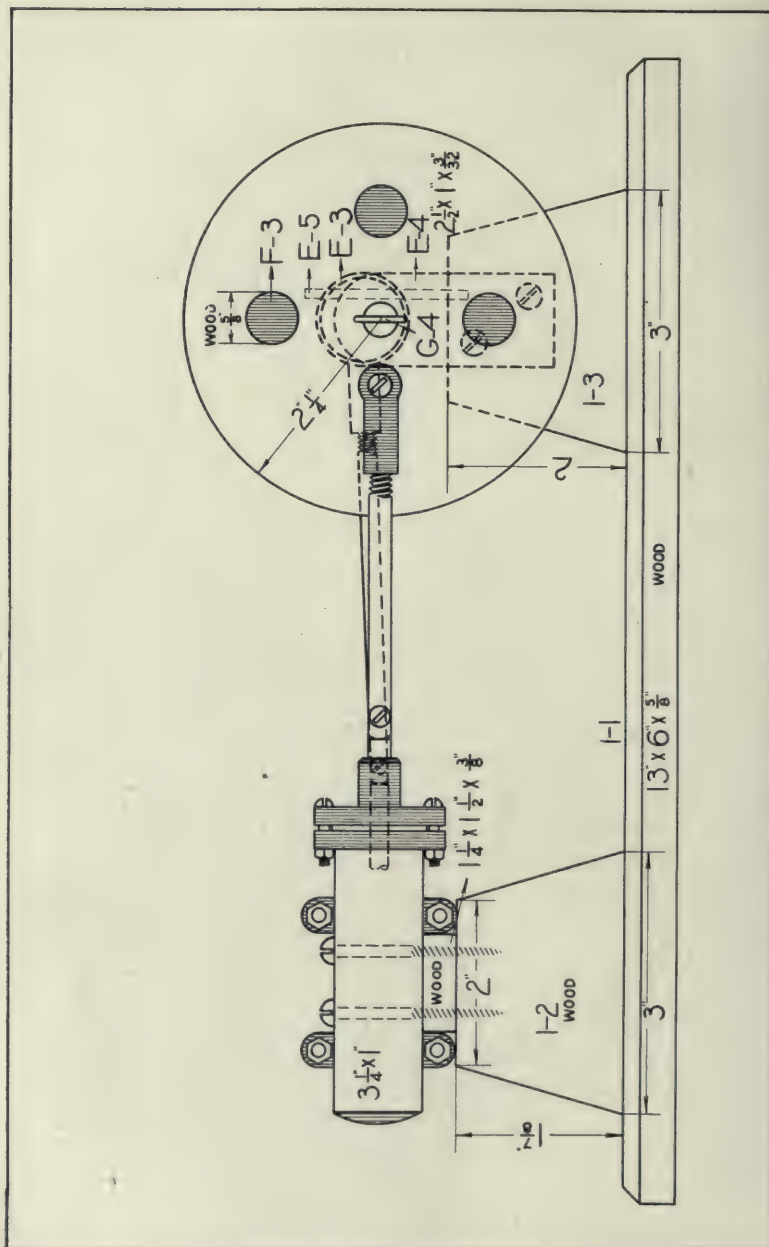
A SOFT-METAL STEAM-ENGINE—SIDE VIEW.
